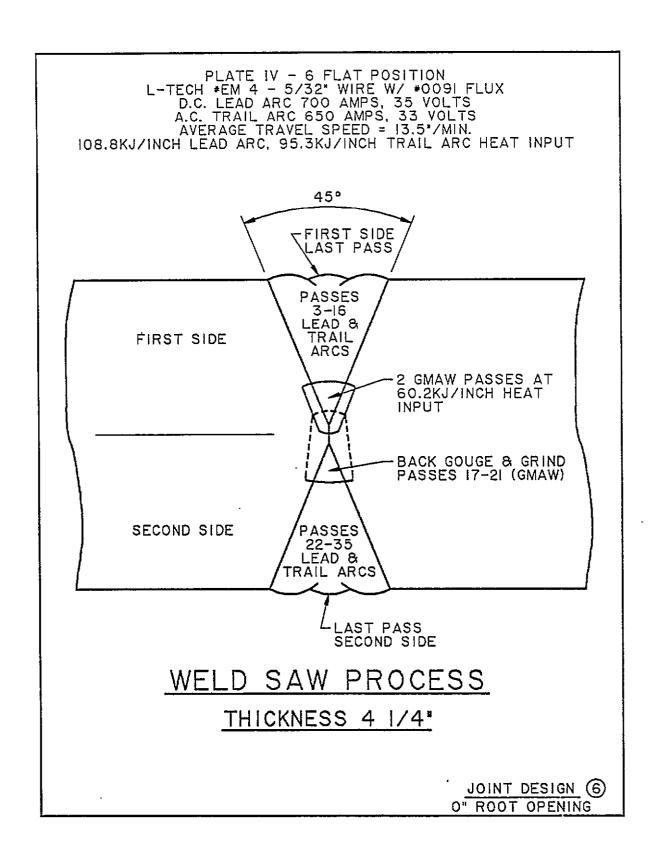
Sub Arc Weld Test Assembly for 4-1/4-Inch Thick 100 ksi Yield Strength Steel - Plate IV-6
